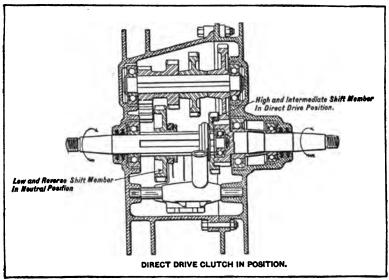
How Small Sliding Gear is Shifted to Lock the Two Portions of the Divided Main Shaft Together and Secure the Third Speed or Direct Drive.
